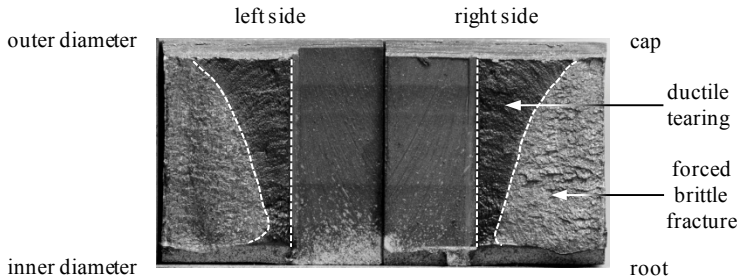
Fracture surface for through thickness oriented notch (specimen WM-15)
